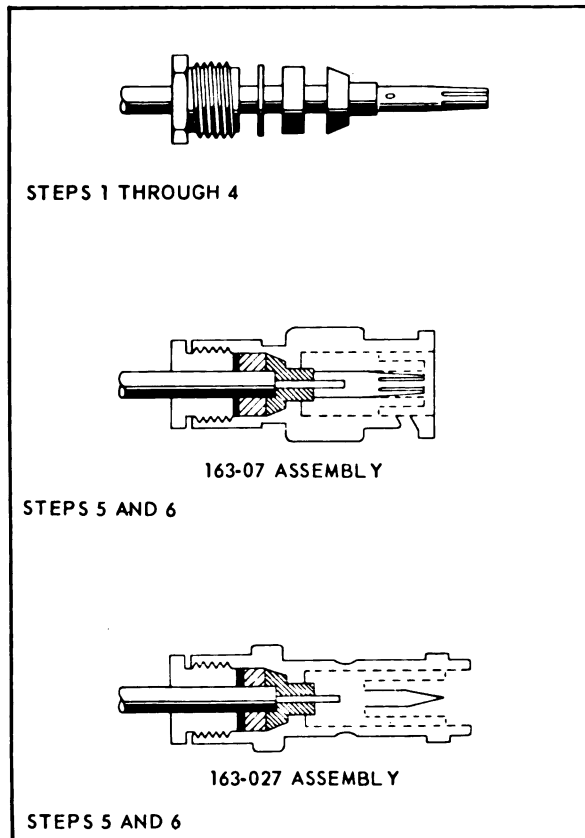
Attaching Avien 163-07 and 163-027 Connectors to Unshielded Wire
